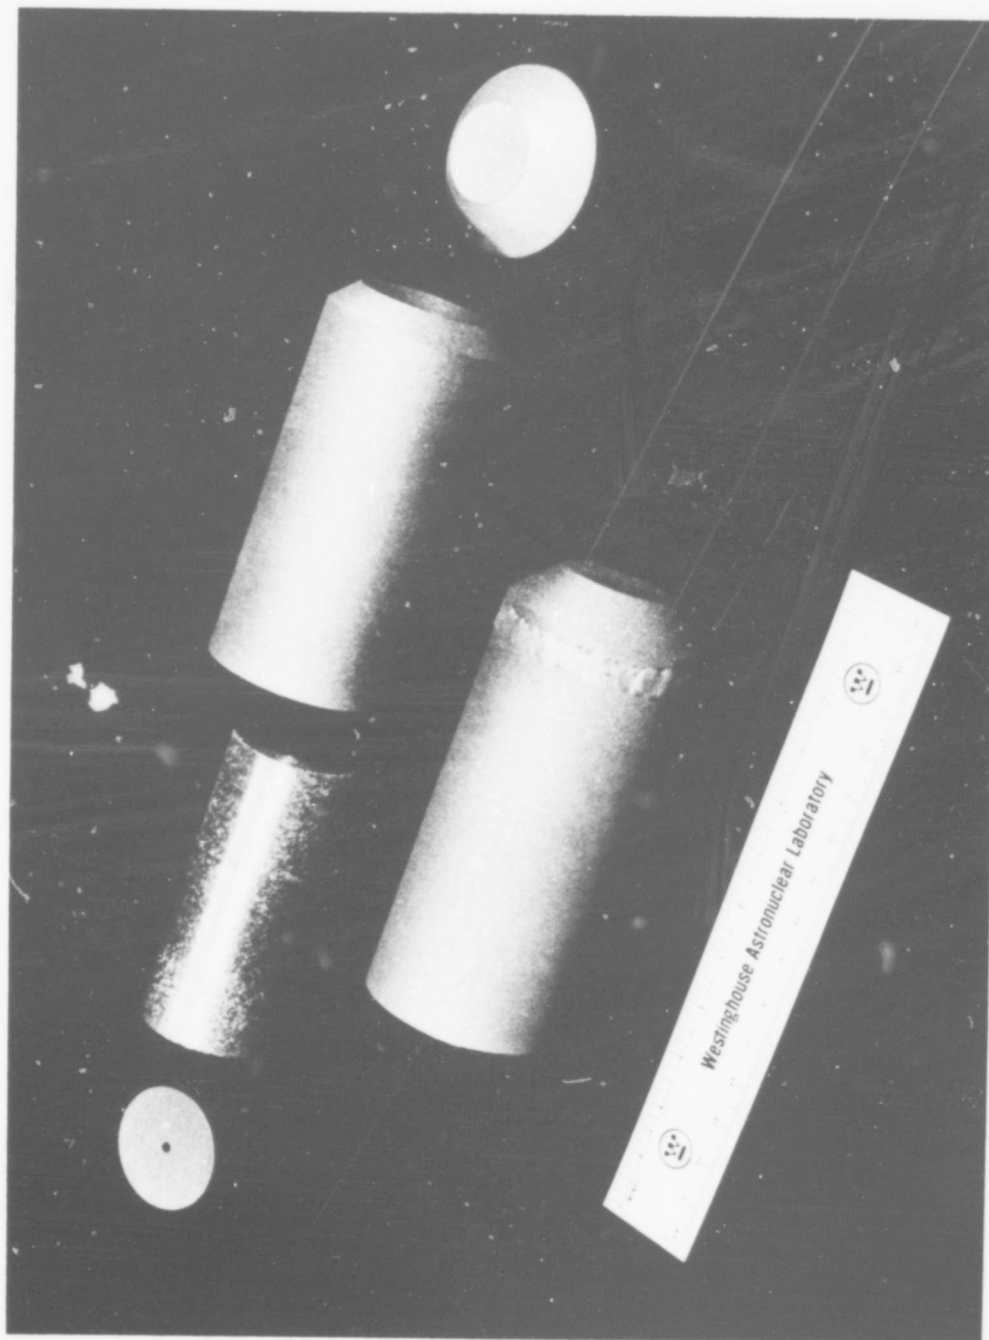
An Exploded View Showing a Machined Pressing with Extrusion Can Components (Top), and an Assembled and Welded Extrusion Billet (Bottom)
